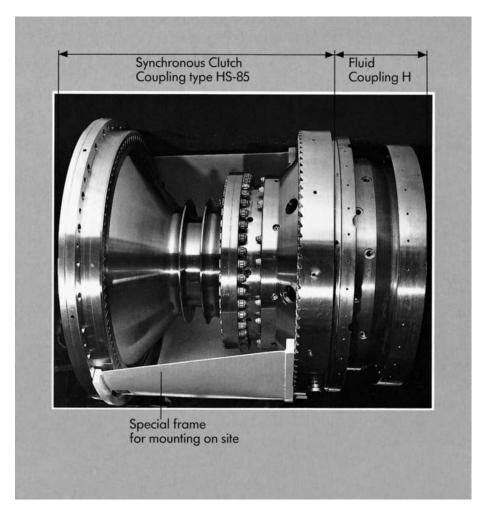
Synchronous clutch coupling HS-85-H between a gas turbine and alternator. (Source: MAAG Gear Company.)
